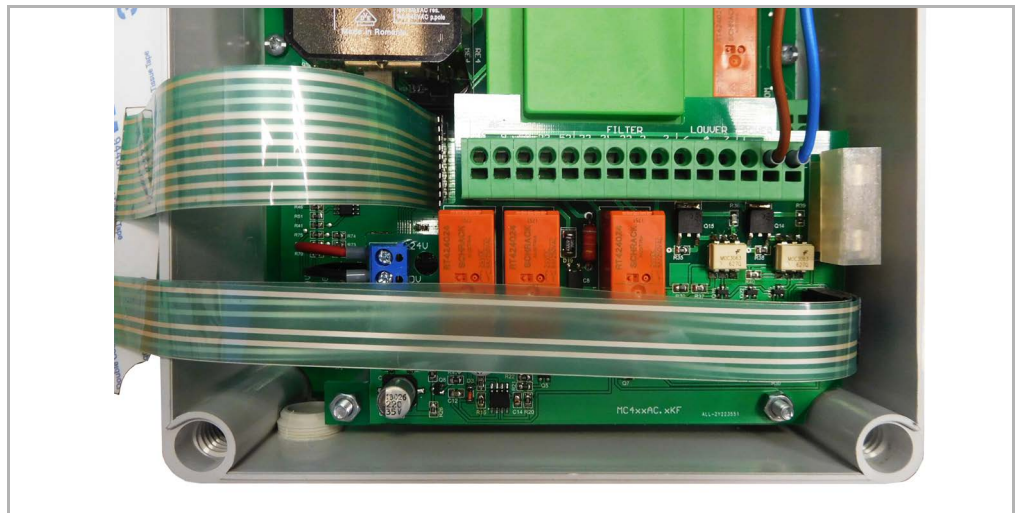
Connection of the controller PCB of the MC4 switch unit – terminal block X1 and X2
